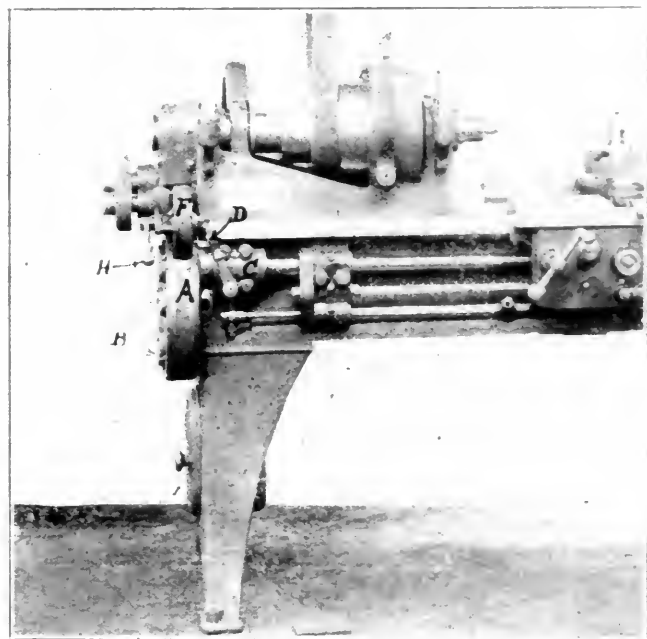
IDEAL LATHE, SPRINGFIELD MACHINE TOOL COMPANY, SHOWING CHANGE-GEAR BOX.
